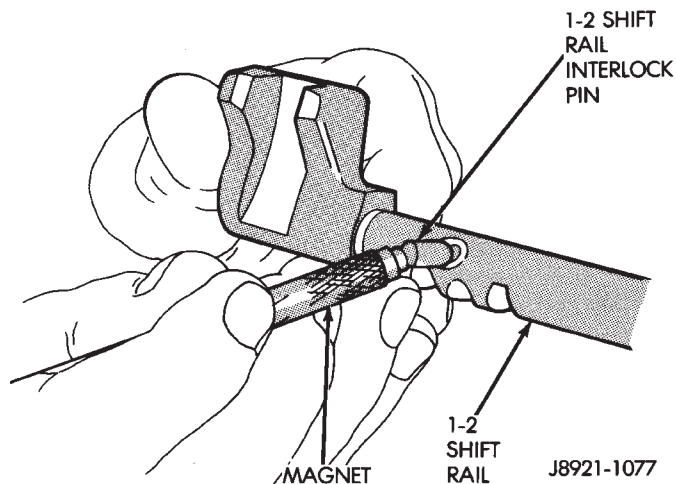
Remove 1-2 Shift Rail Interlock Pin
